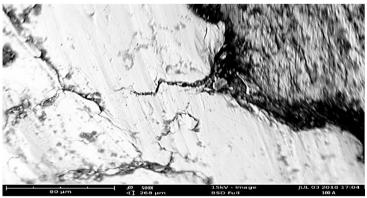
Fracture Surface of the Test Specimen of Low Heat Input at 500X Magnifications
